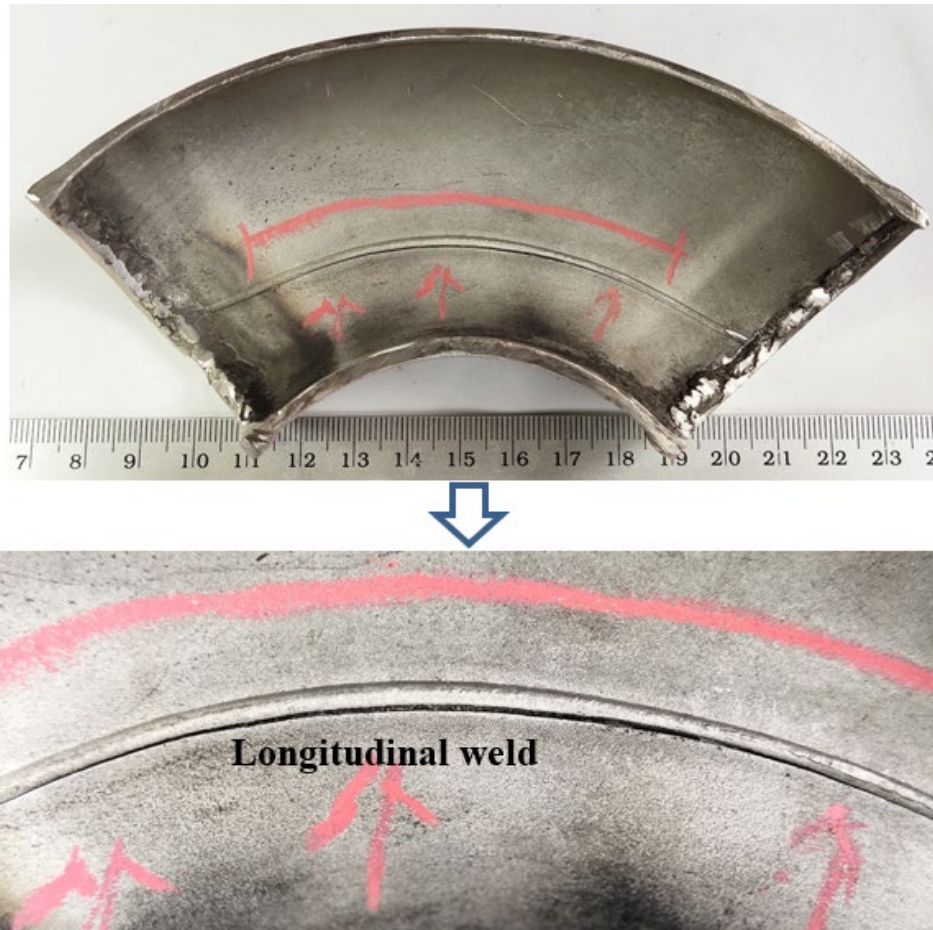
Close-up view at the internal surface after cutting the elbow into two halves showing a longitudinal weld that had been applied for fabricating the elbow
